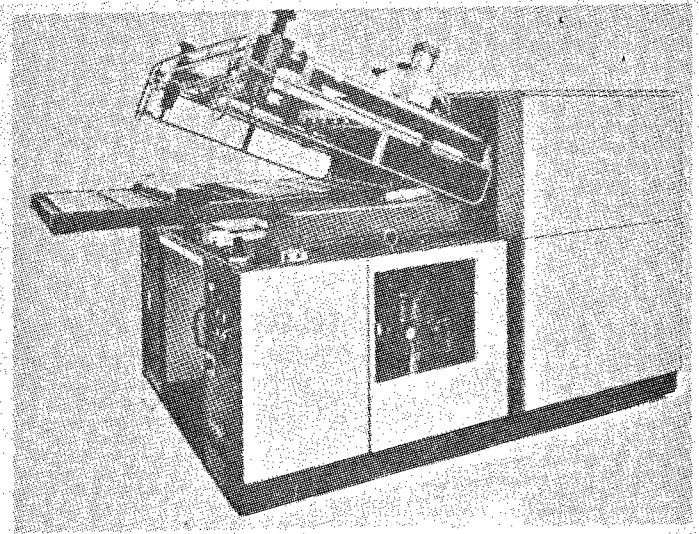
PCB printing machine with alternating printing table, Gornsdorf Contact Components and Specialized Machine Building VEB.
